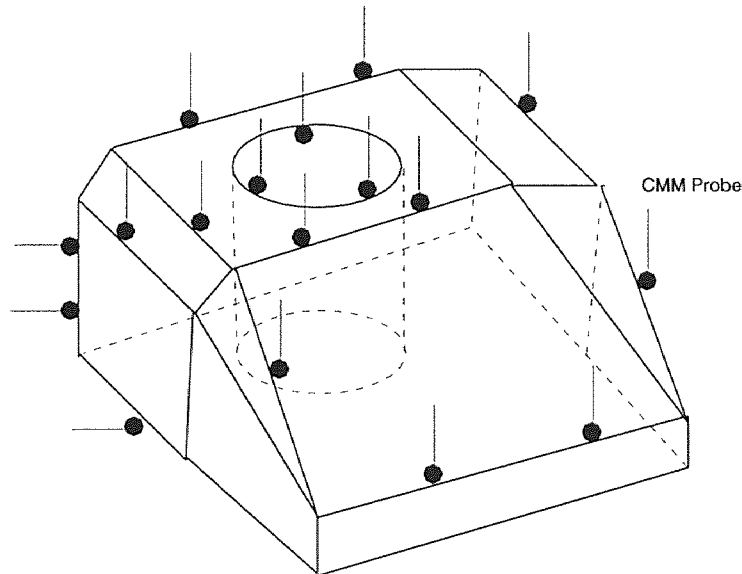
The Diagram of using a CMM to Inspection Parts
